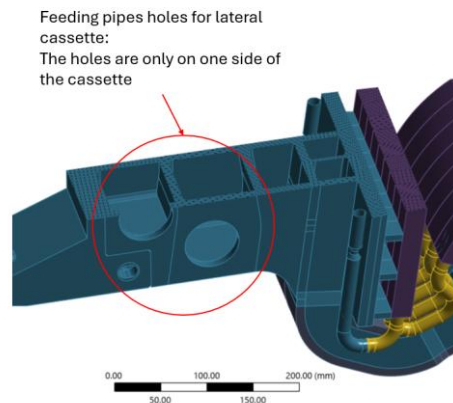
Section view of engineering model highlighting the feeding pipes holes only on one side
